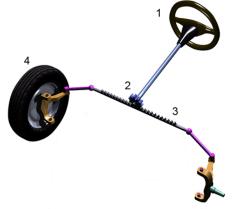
Steering system of a car consisting of: Steering wheel (1), circular gear (2), linear gear (3) and wheel (4). Edited from: https://commons.wikimedia.org/wiki/File:Steer_system.
